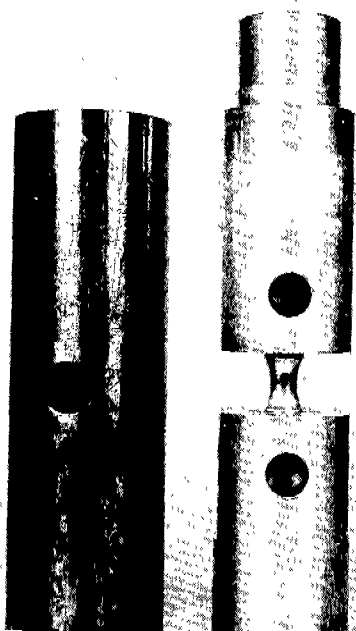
"SLEEVE AND SLIDE" ASSEMBLY.
